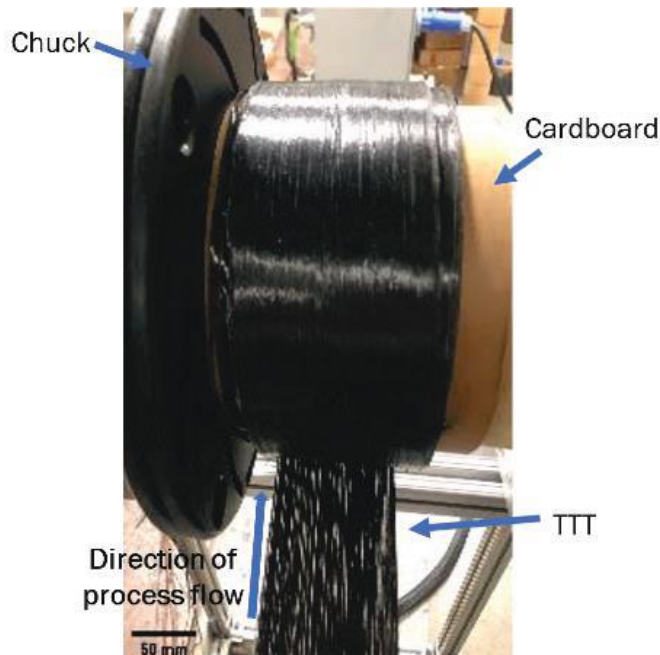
Take-up system collecting the TCF thermoplastic impregnated tape. The TTT is wrapped about a cardboard tube clamped on a chuck to collect it. The chuck is further connected to a clutch that adjusts torque to maintain tension constant inline. Source: FCMF.
